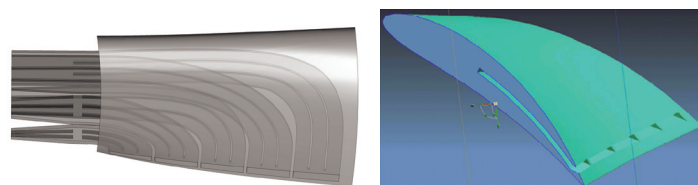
Rotor blade with internal passages, guide vanes and flow restrictors at the passage entrances (left), and CAD geometry (right) provided by the USI
